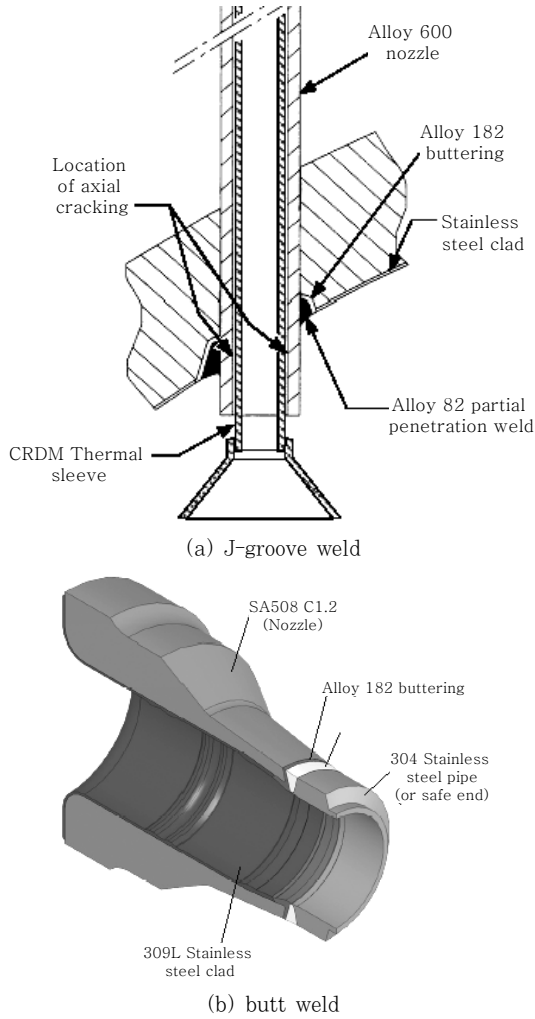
Dissimilar metal welds in reactor coolant system
